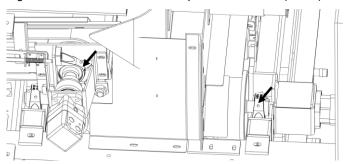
overview of lubrication points right machine door, behind switch cabinet (43,44)
